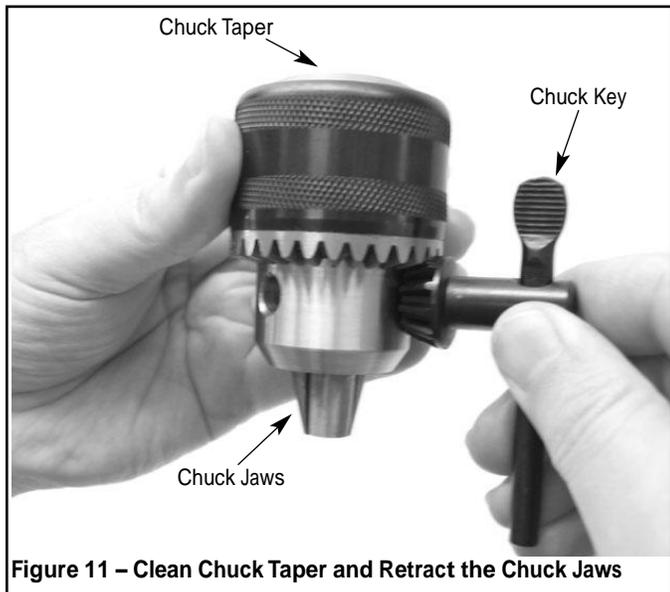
Clean Chuck Taper and Retract the Chuck Jaws
